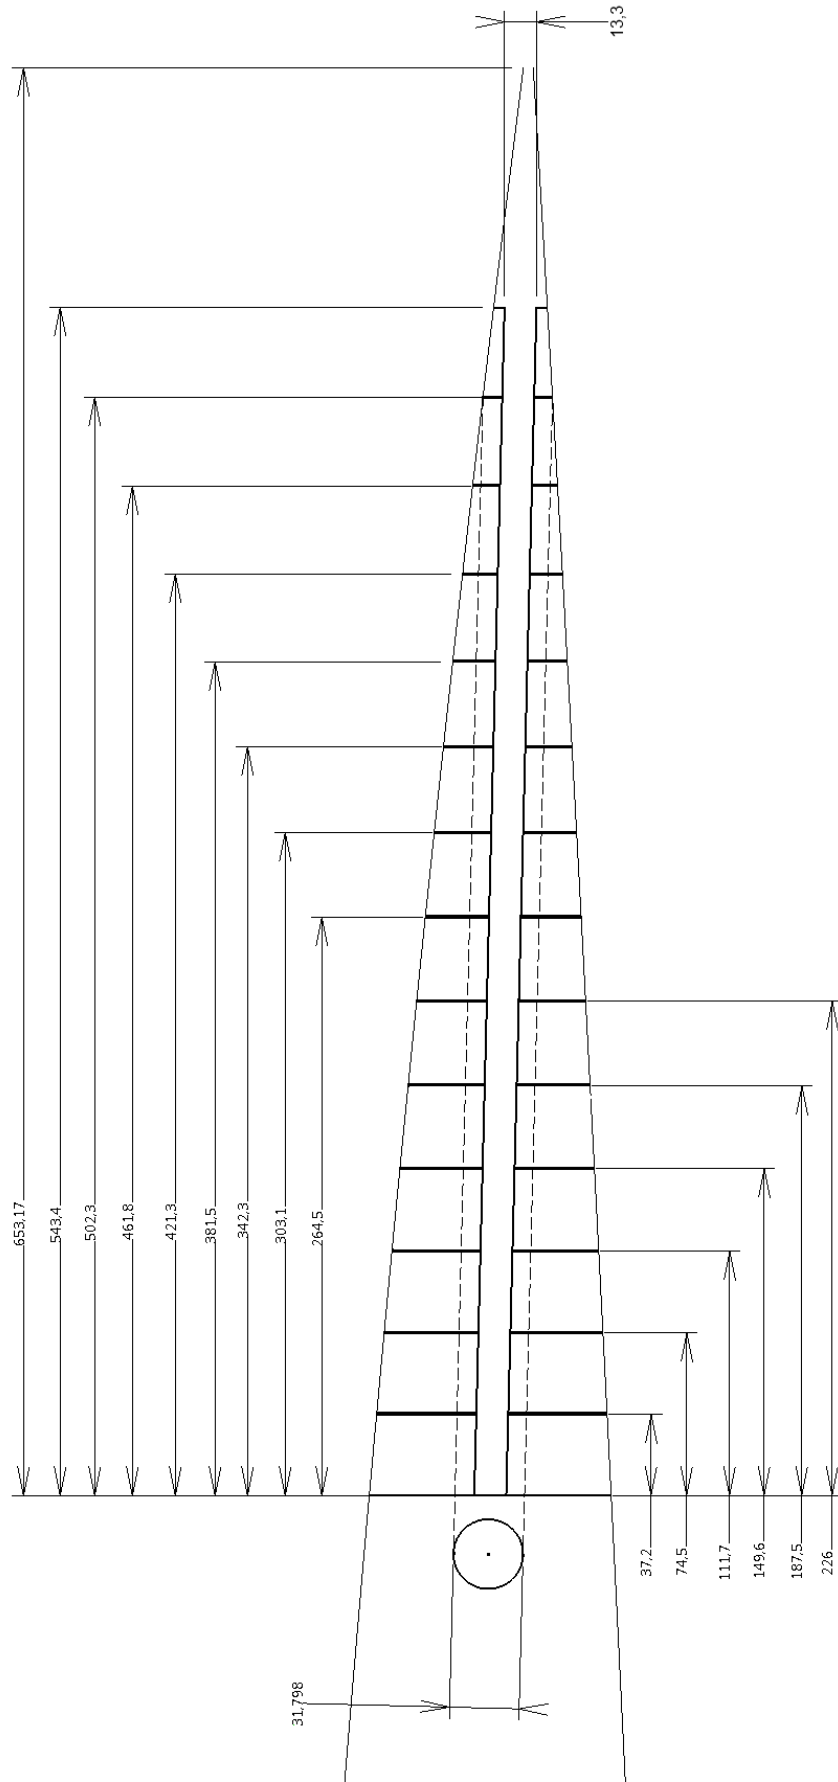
Final layout of the aileron mechanism with stringer placement dimensions
